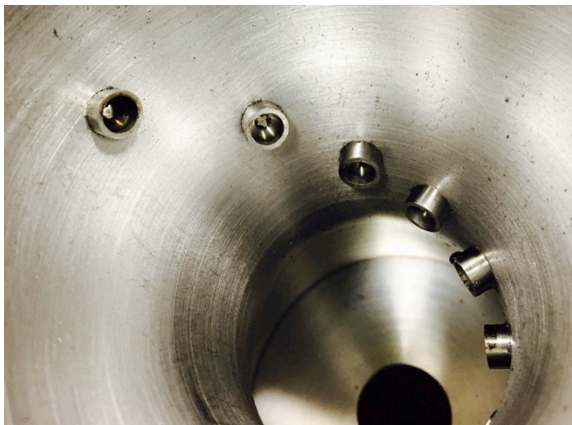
Nozzle inner bore following the installation of the 12 thermocouple plugs. The guide length and final thermocouple welds can be seen from the backside of the plugs.
